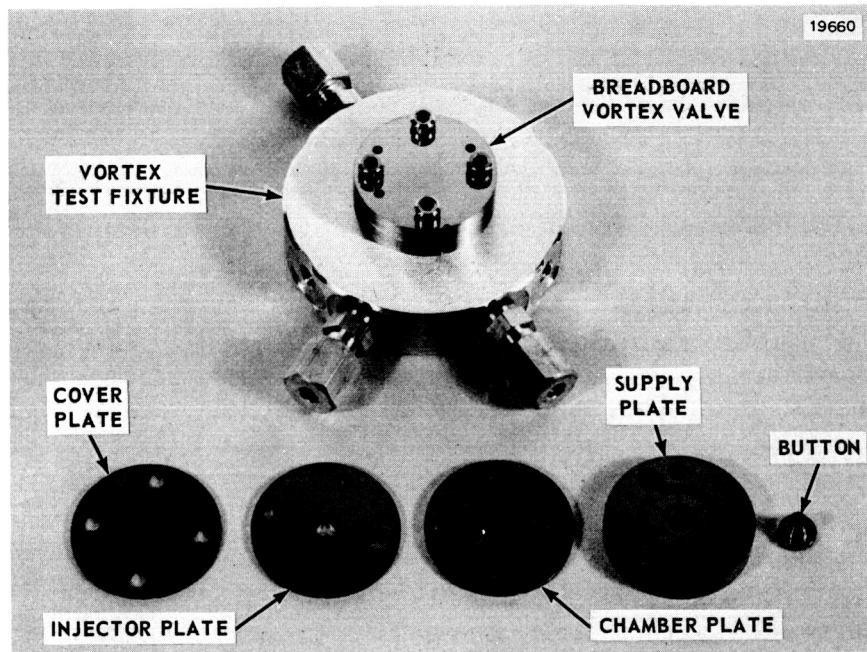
Breadboard Vortex Valve and Test Fixture
